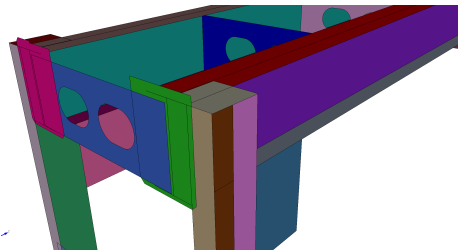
Close Up Sheet Bodies: cnc-tube-cutter-1
